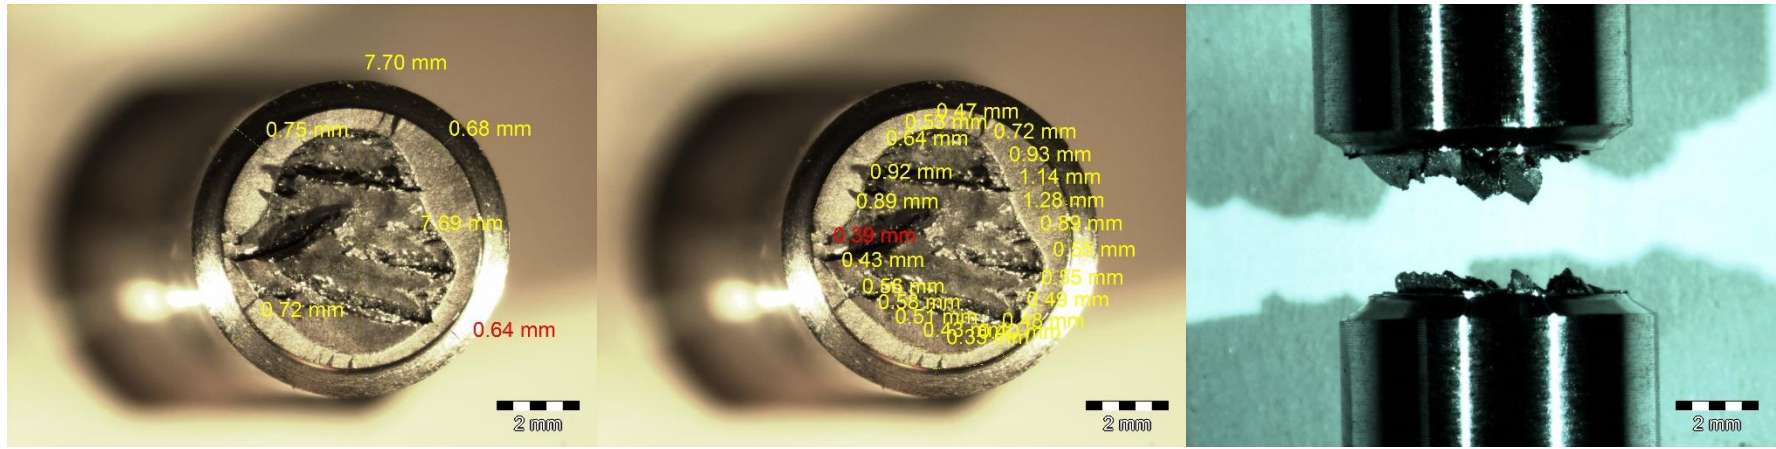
Cross-sectional and side view of fractured StxCRRB-01
